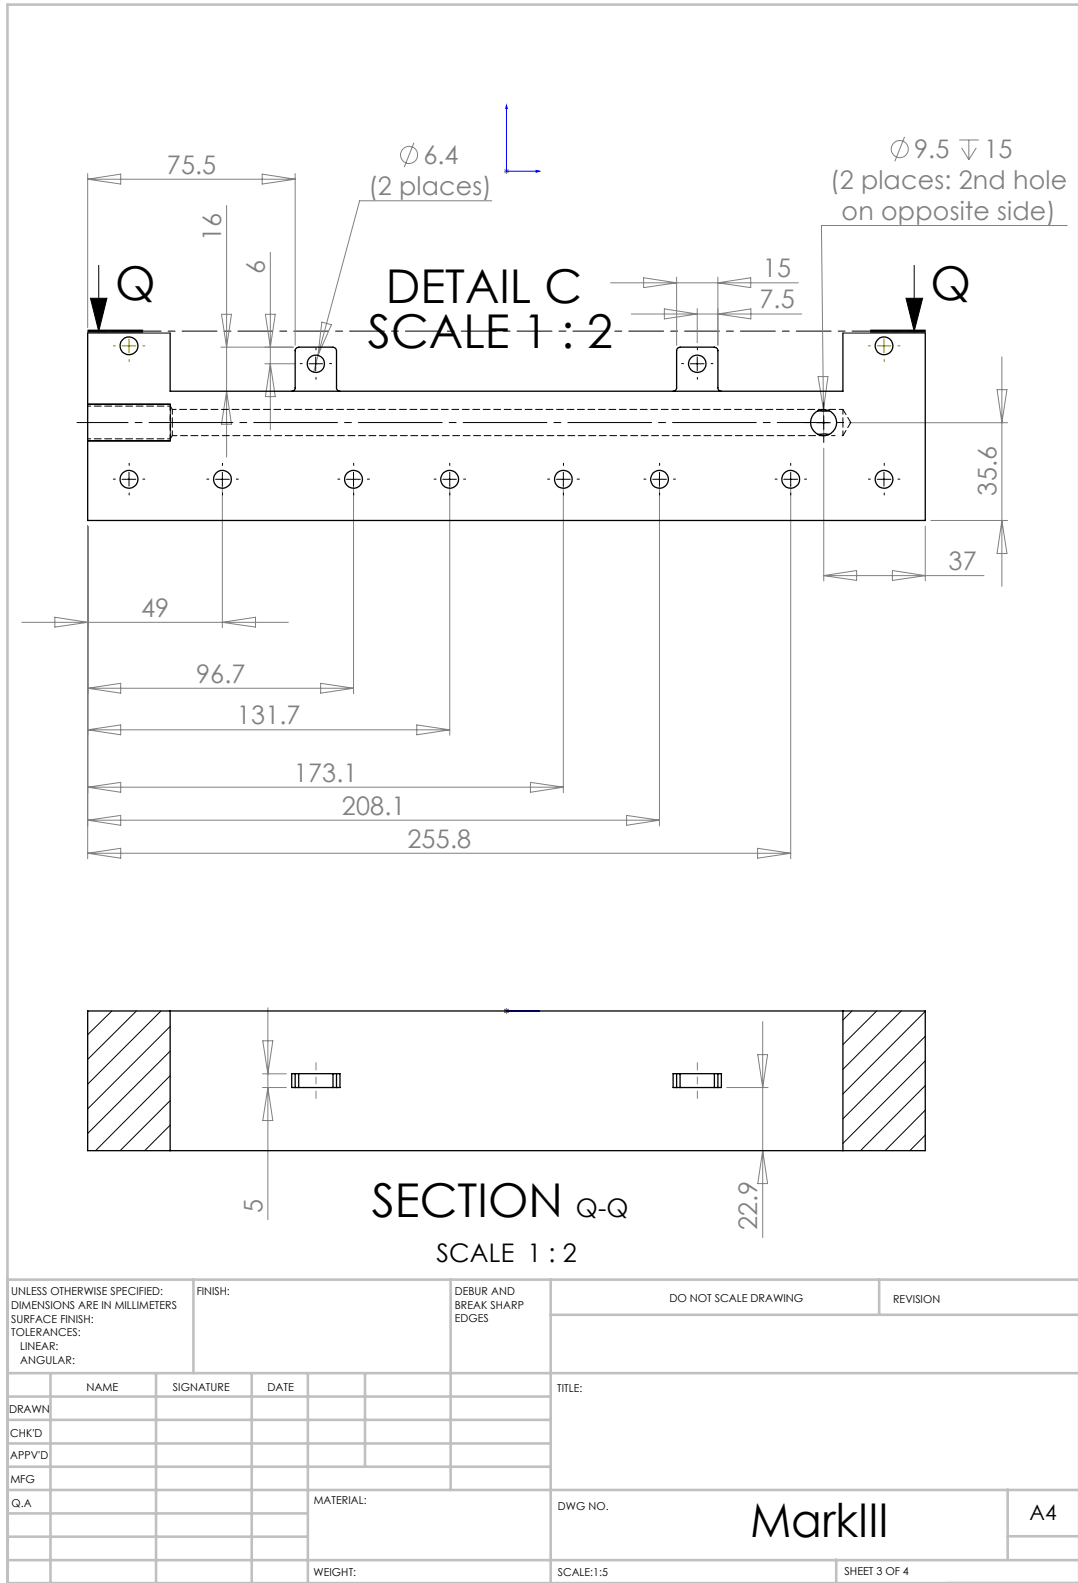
Mark III polypropylene base technical drawing page 1.
